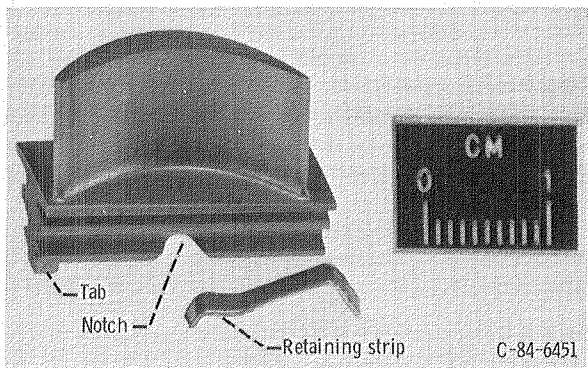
Typical replaceable turbine blade indicating method of securing the blade to the rotor.
